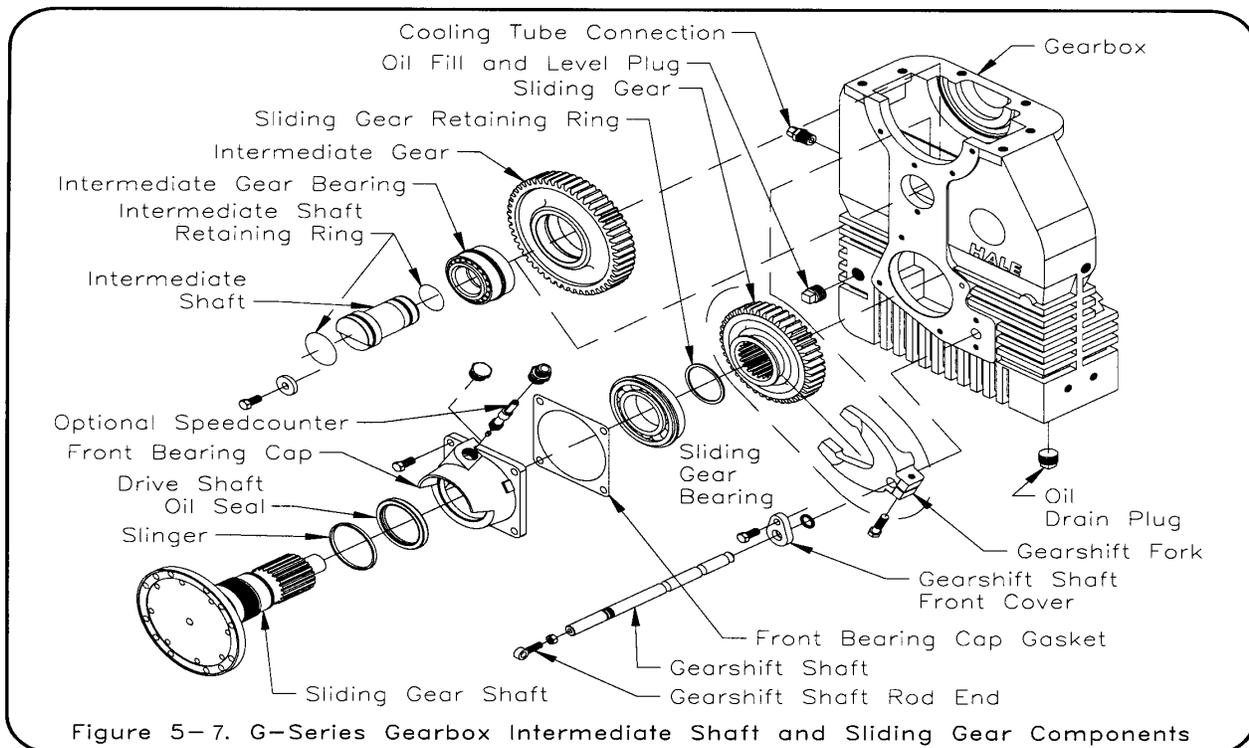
G-Series Gearbox Intermediate Shaft and Sliding Gear Components
